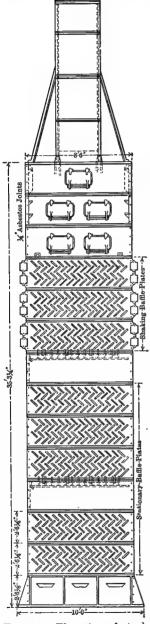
Elevation of stack drier, Edison plant. (Engineering News.)
